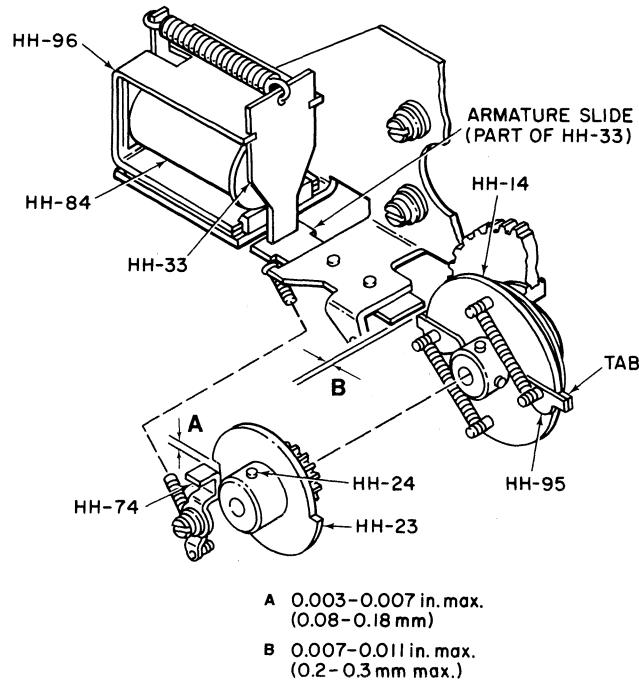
A. TWO ADJUSTMENTS, GEAR WITH STOP CAM (HH-23) AND INSIDE CAM (HH-14)
